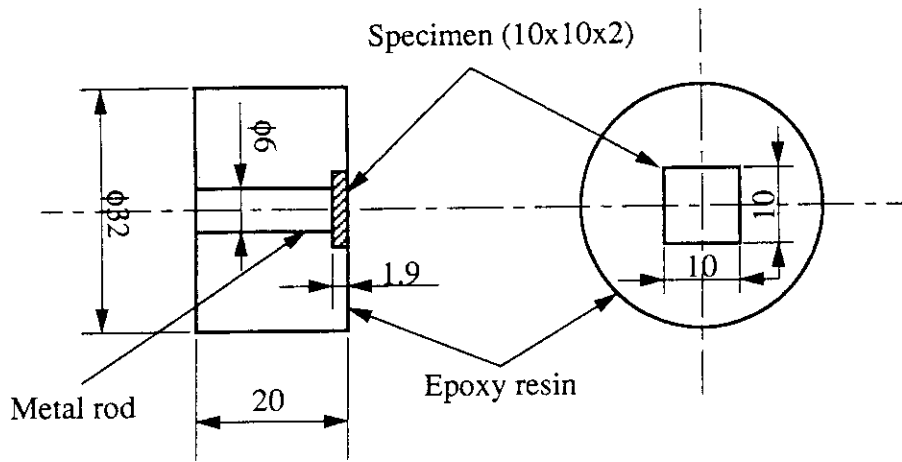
Specimen for electrochemical corrosion tests mounted in epoxy resin with metal rod. (mm)
